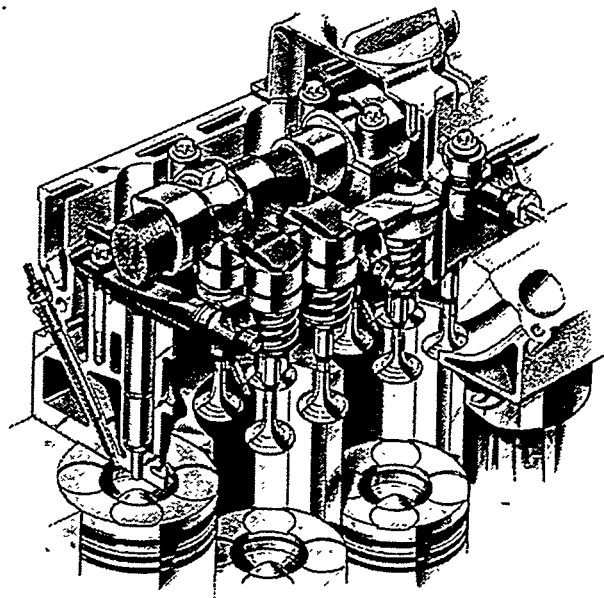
Cutaway of the ECOTEC 2.0 Cylinder Head [3].
